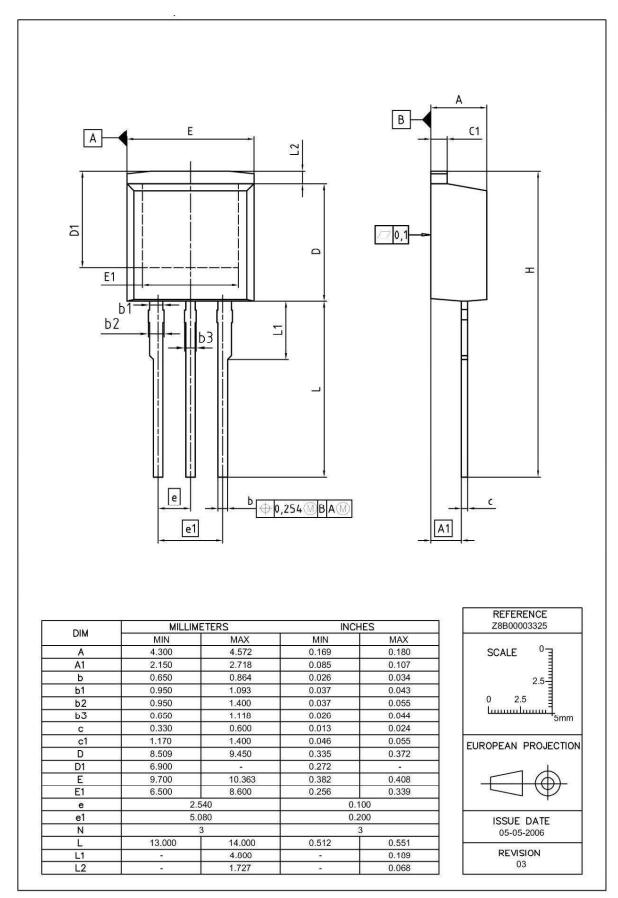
Outline PG-TO 262, dimensions in mm/inches
